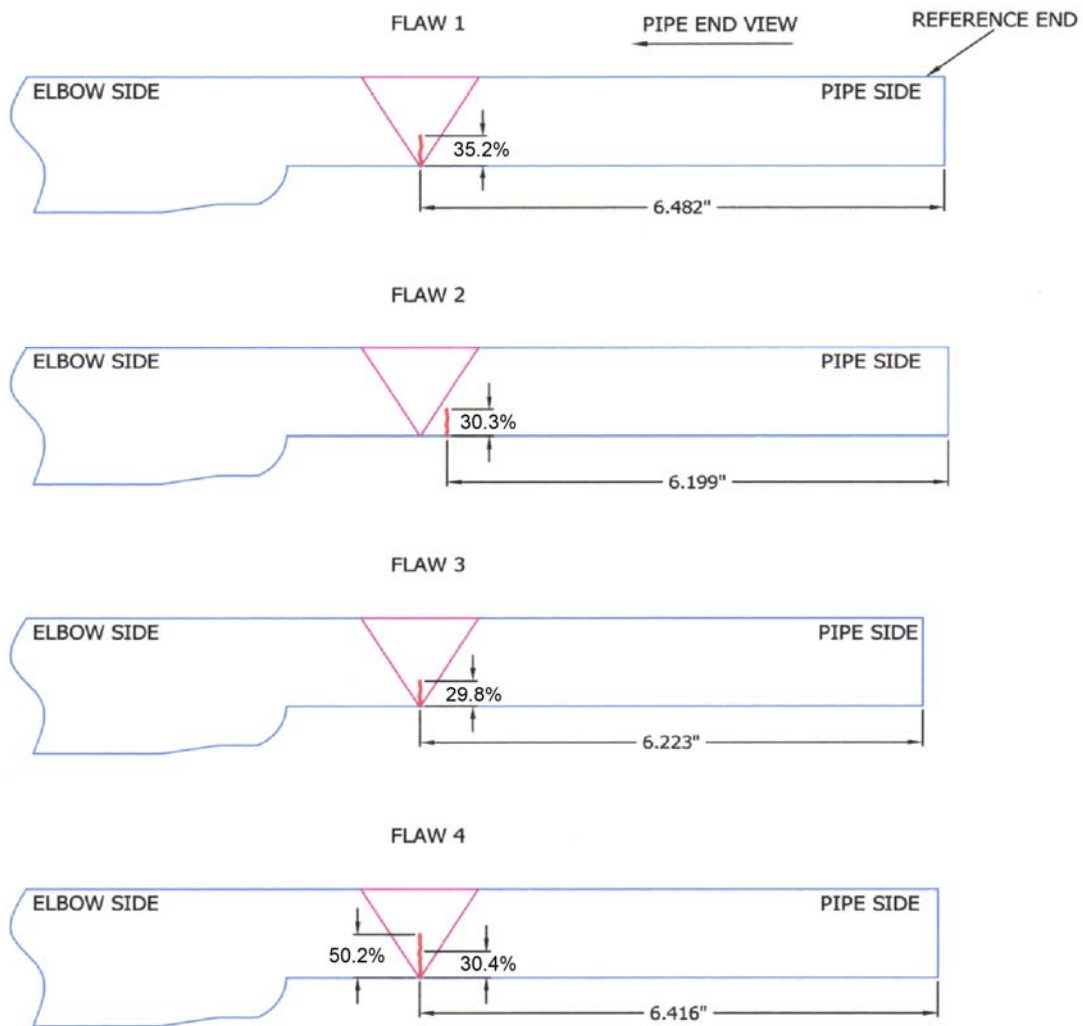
Side View Illustration of All Four Thermal Fatigue Cracks Implanted Into PZR CASS Specimen 7C-059 (courtesy of FlawTech, Inc.)
